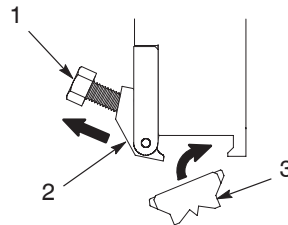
Removing/installing a nozzle (meltblown nozzle shown)
